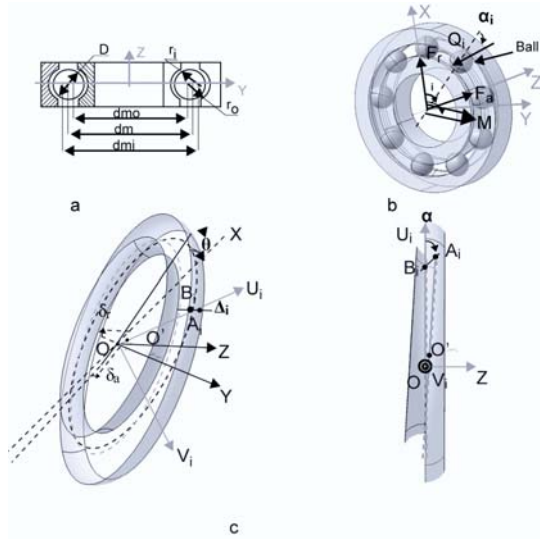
a) Bearing geometry; b) Bearing loads; c) Relative displacements between inner and outer rings.
